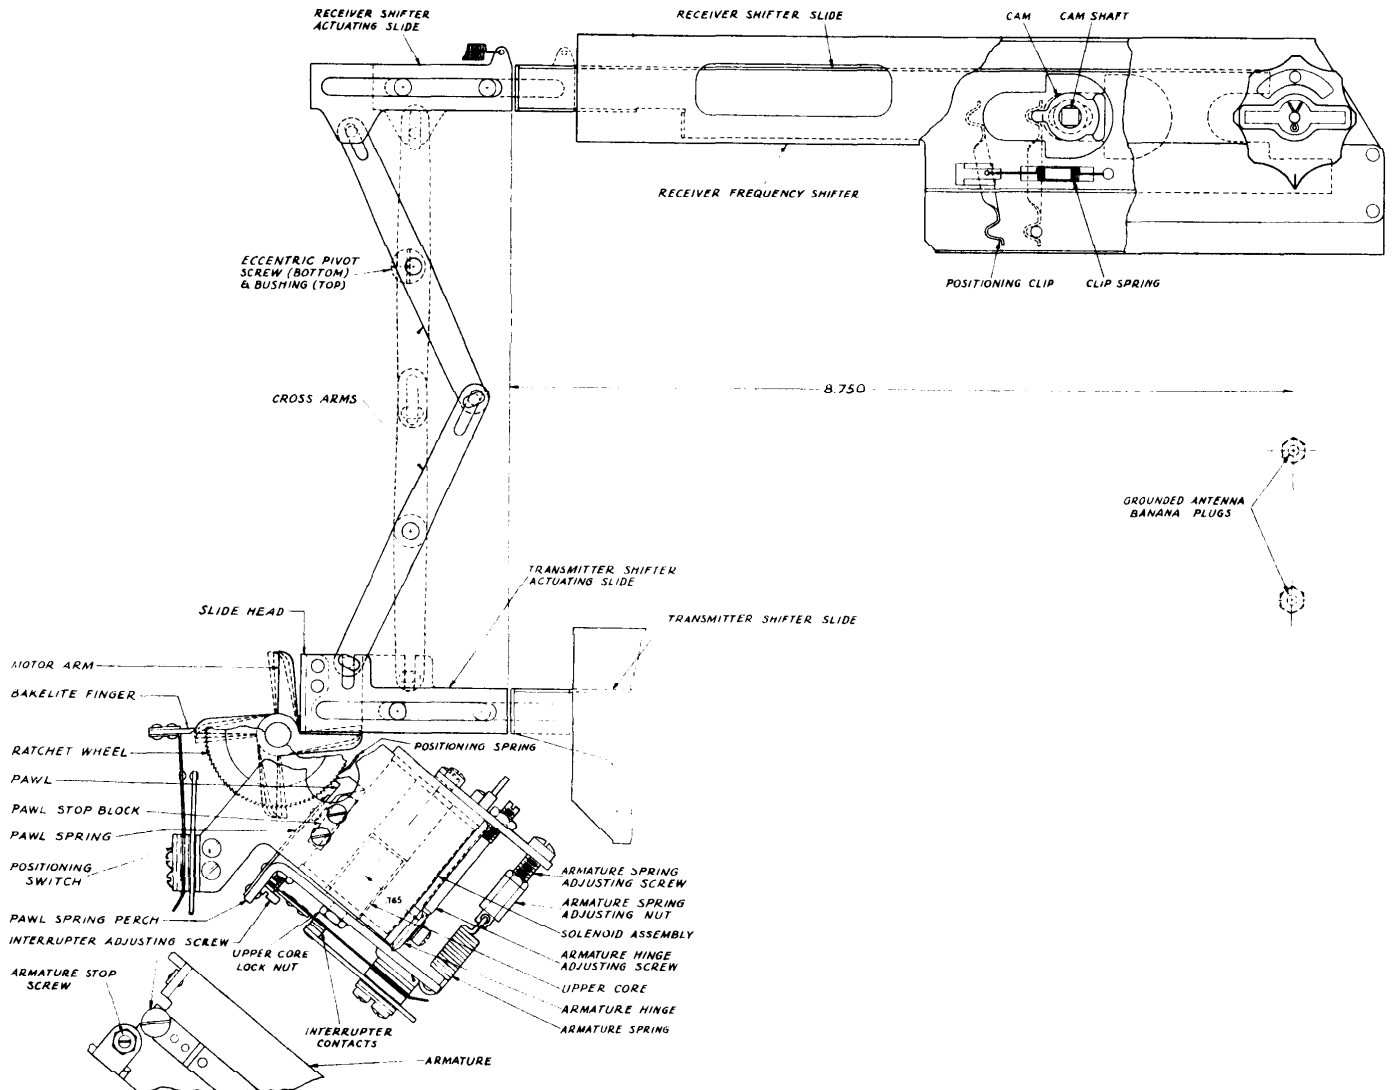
RACK MECHANISM AND RATCHET MOTOR
